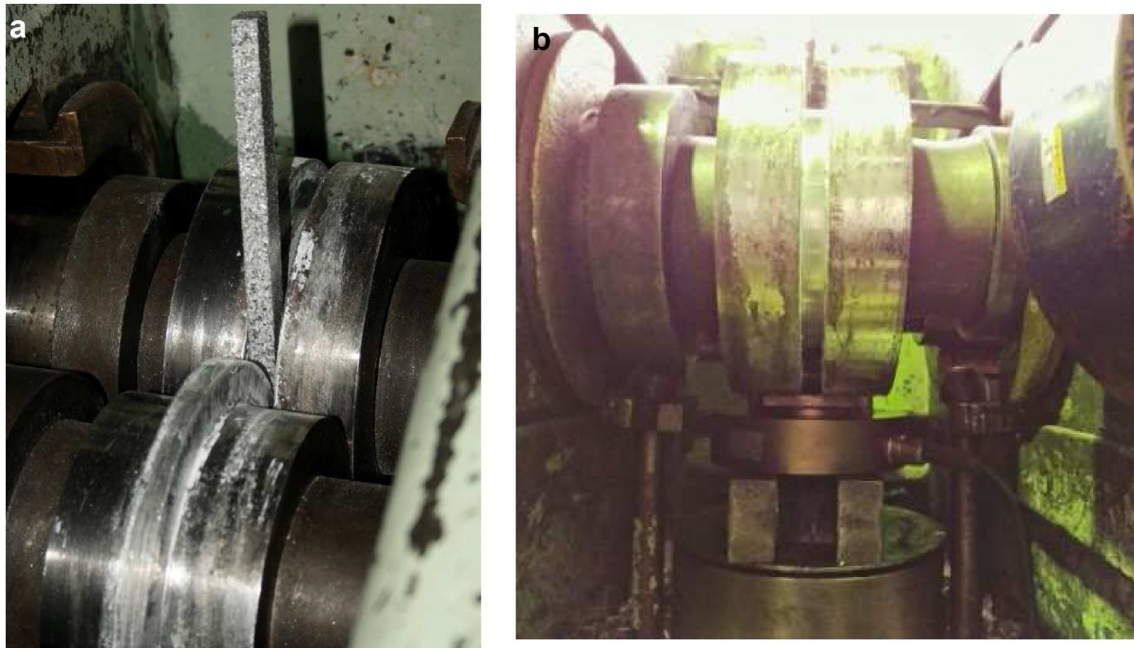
Deforming unit of the CRE-200 unit: (a) roll assembly and briquette, set into rolls; (b) hydraulic device for clamping the die.
